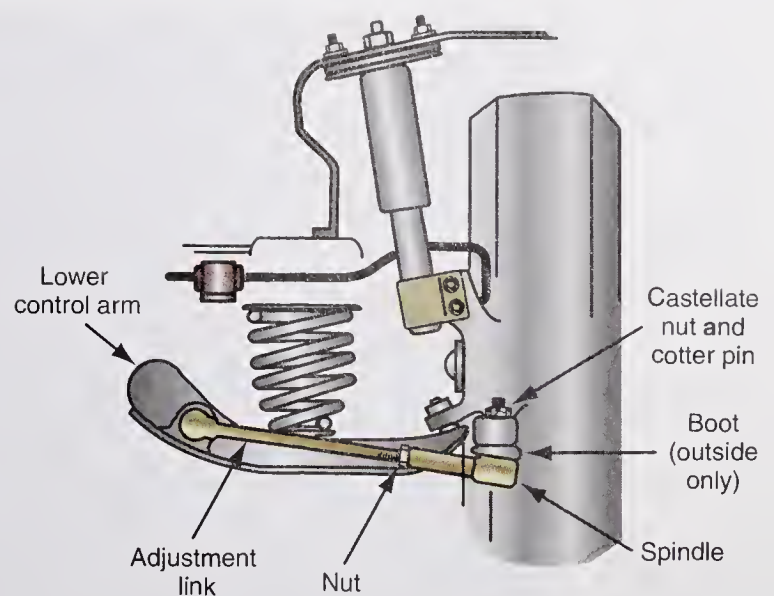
Removing the suspension adjustment link from the lower control arm.
